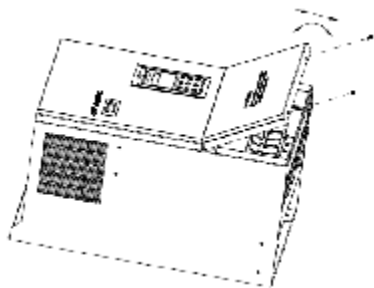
Dis-assembly and mounting sketch of metal cover
